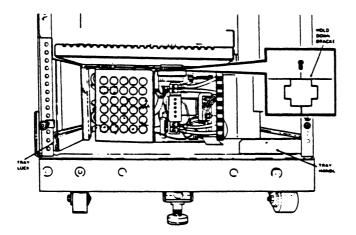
CABINET POWER SUPPLY REMOVAL
